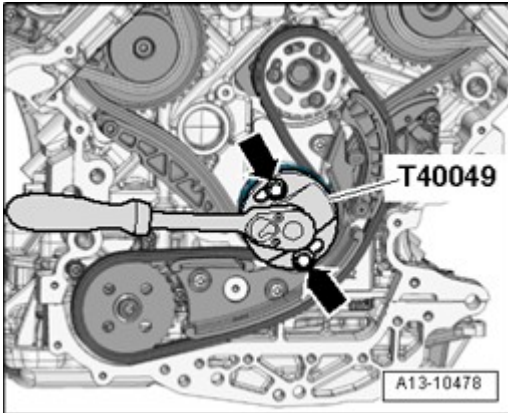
Installing Key T40049 At Rear On Crankshaft Using Old Bolts For Dual-Mass Flywheel
